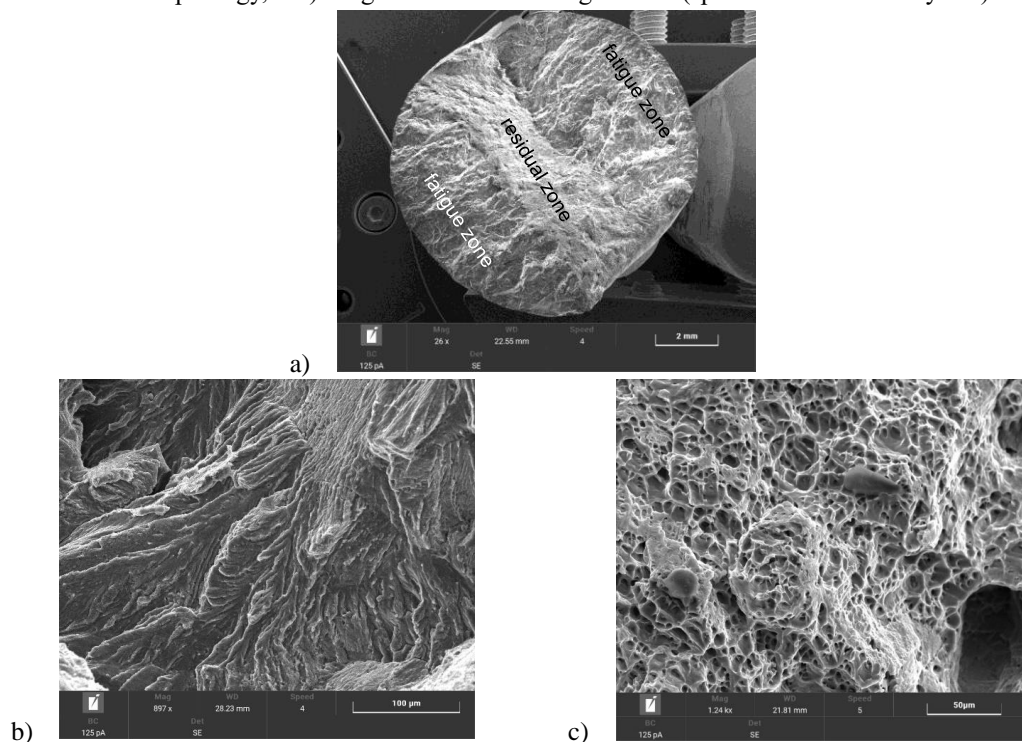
Fatigue fracture of the alloy after T64 treatment caused by combination of bending and torsion $\tau_a=0.5\sigma_a$ (a) fracture morphology, b) fatigue bands in the fatigue zone, c) surface in the area of the residual zone (specimen 38 – 3 549 894 cycles).
